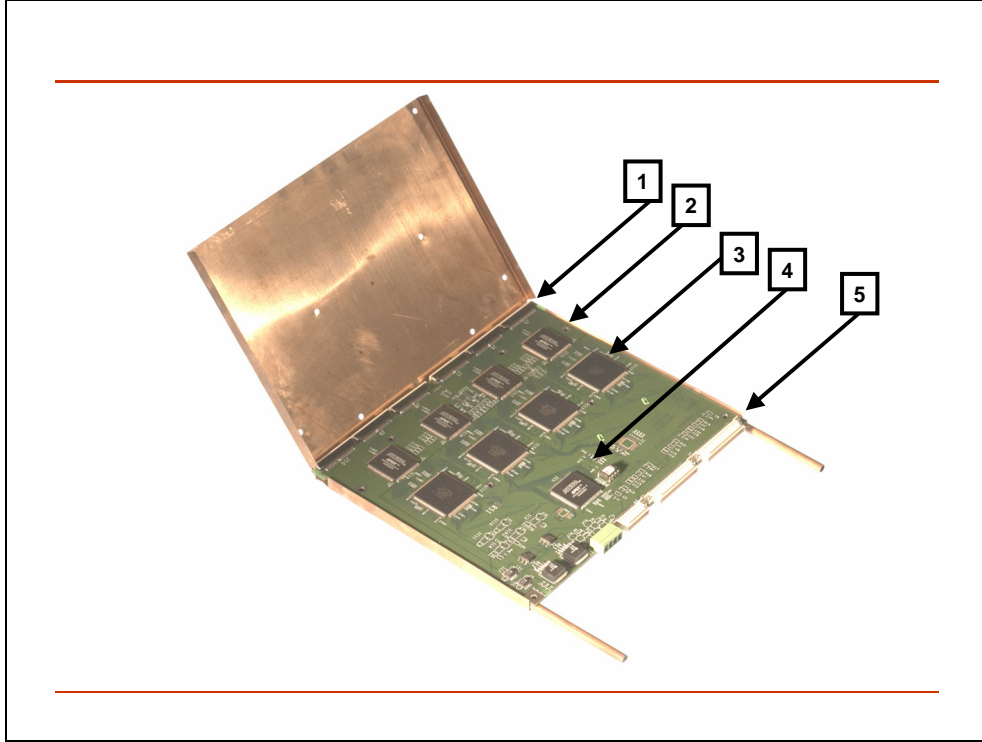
The assembled Front End Card enveloped in two copper plates. The plates are opened for illustration purposes. Indicated is 1. The connectors for the capton cables to the detector pads, 2. The 4 PASAs (4 more on the backside of the PCB), 3. 4 ALTROS (again 4 more on the backside), 4. The Board Controller (BC) and 5. the connectors for the Front End Bus.
